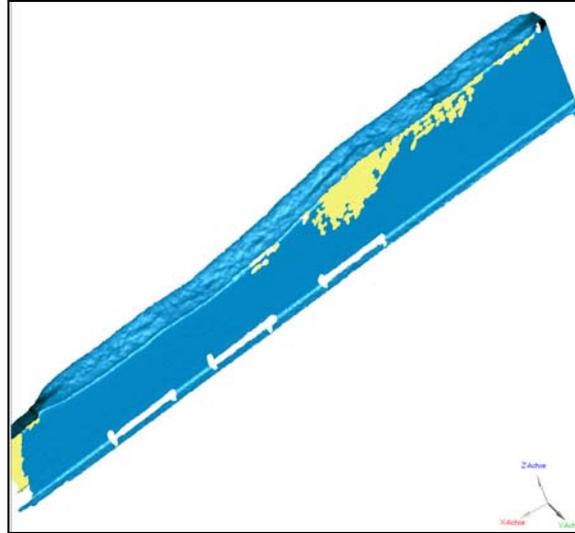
3D reconstruction of the fracture surface (courtesy of IVB GmbH)
